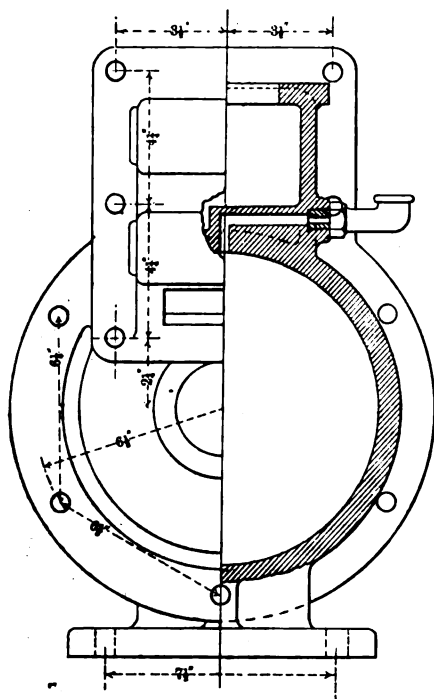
Vertical Section and Elevation of Air Cylinder.
